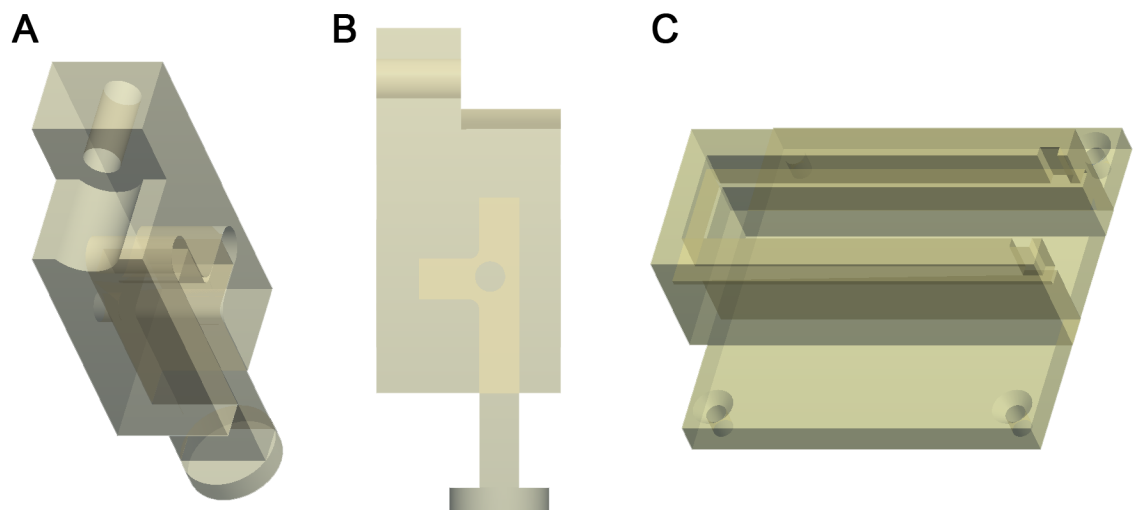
3-D printed compression injury device components. (A) The piston assembly with 10 mm piston inserted. (B) Right profile of the piston assembly. (C) The compression injury frame for holding chamber slides.
